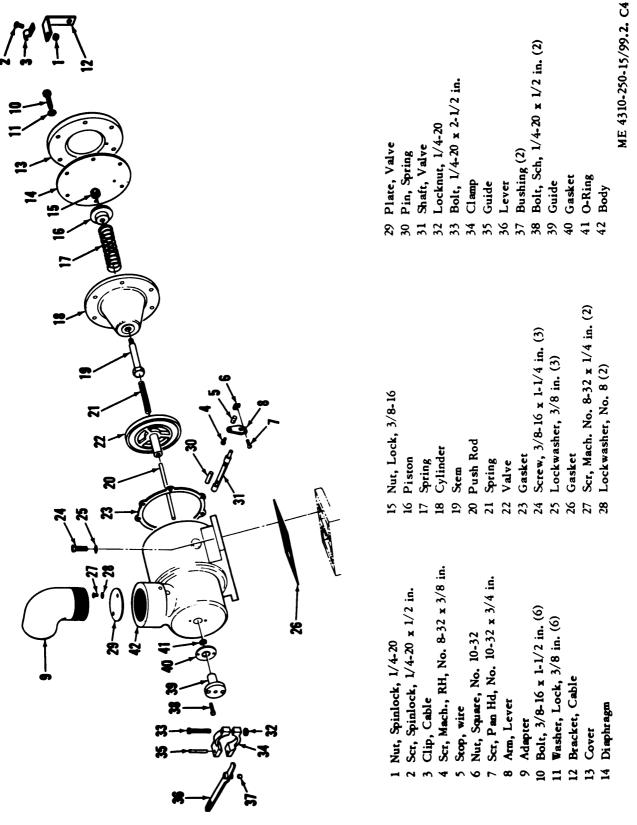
Air intake-unloader assembly, disassembly and reassembly; Model 9M250RPV.
